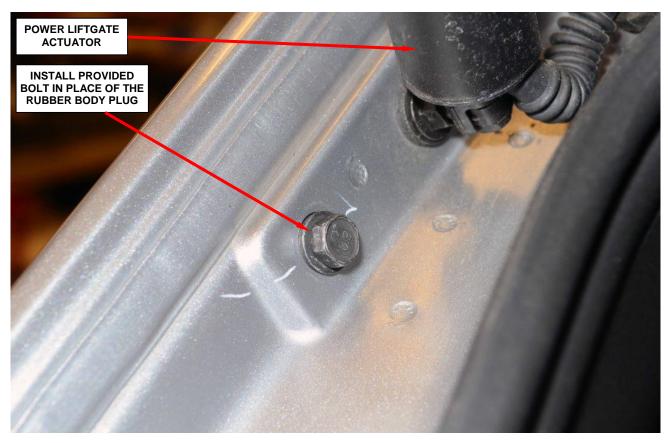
Install Bolt in Place of Original Rubber Body Plug
